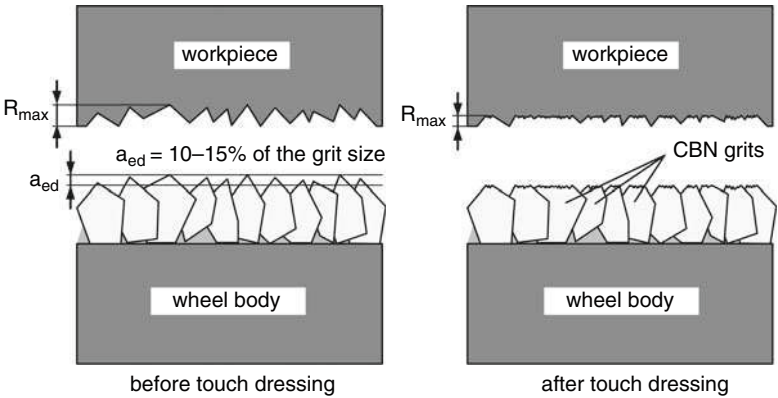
Schematic of touch dressing an electroplated CBN grinding wheel
